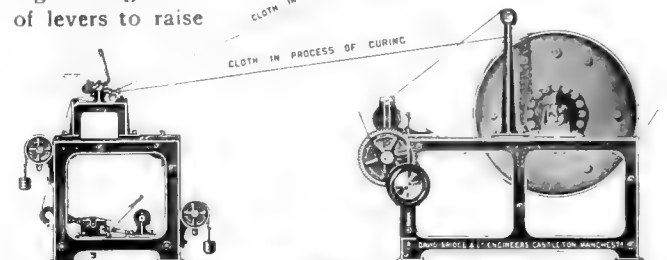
POLISHING, CURING, AND PASTING MACHINE.
